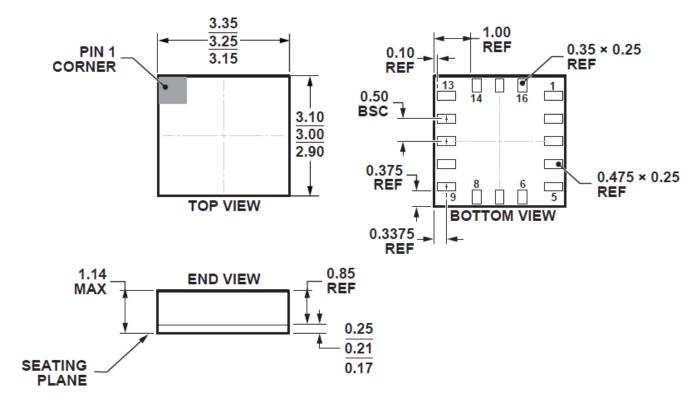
16-Terminal Land Grid Array [LGA] (CC-16-3) Solder Terminations Finish Is Au over Ni Dimensions shown in millimeters
